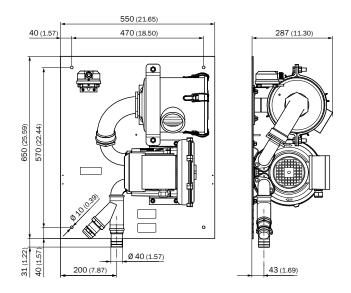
Dimensions, purge air unit (all dimensions in mm (inch))
